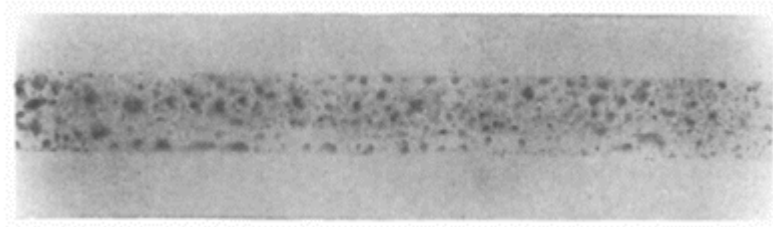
Radiograph, showing gross porosity in weld metal.
